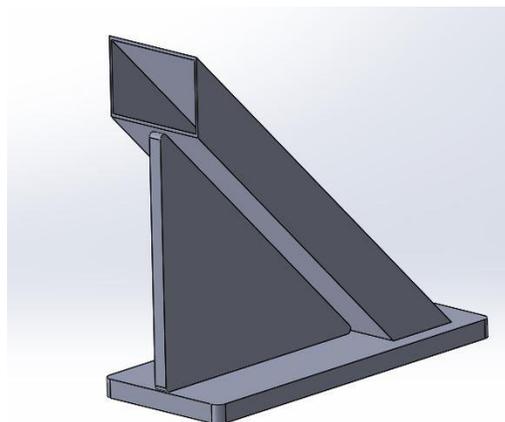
Final Drive End, Inboard Support Leg, Rectangular Tubing
